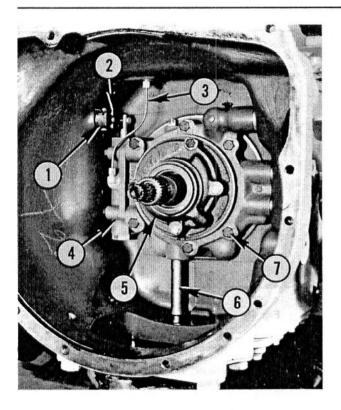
Oil Manifold, Pump and Valve Linkage
